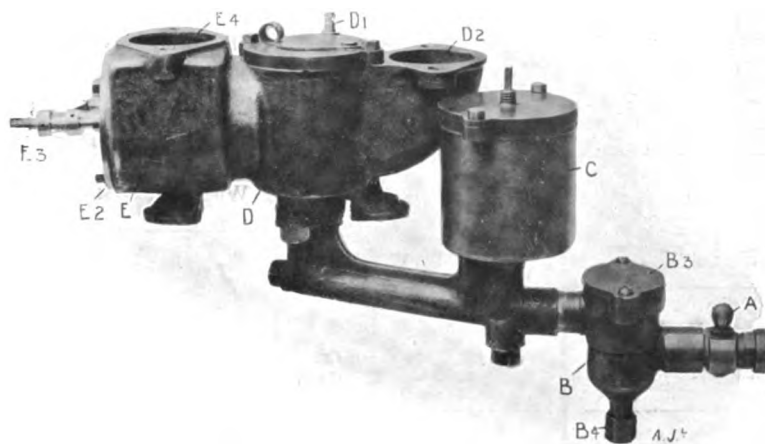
The 1905 Napier Carburettor, fitted with hand and governor-controlled throttle-valves.
